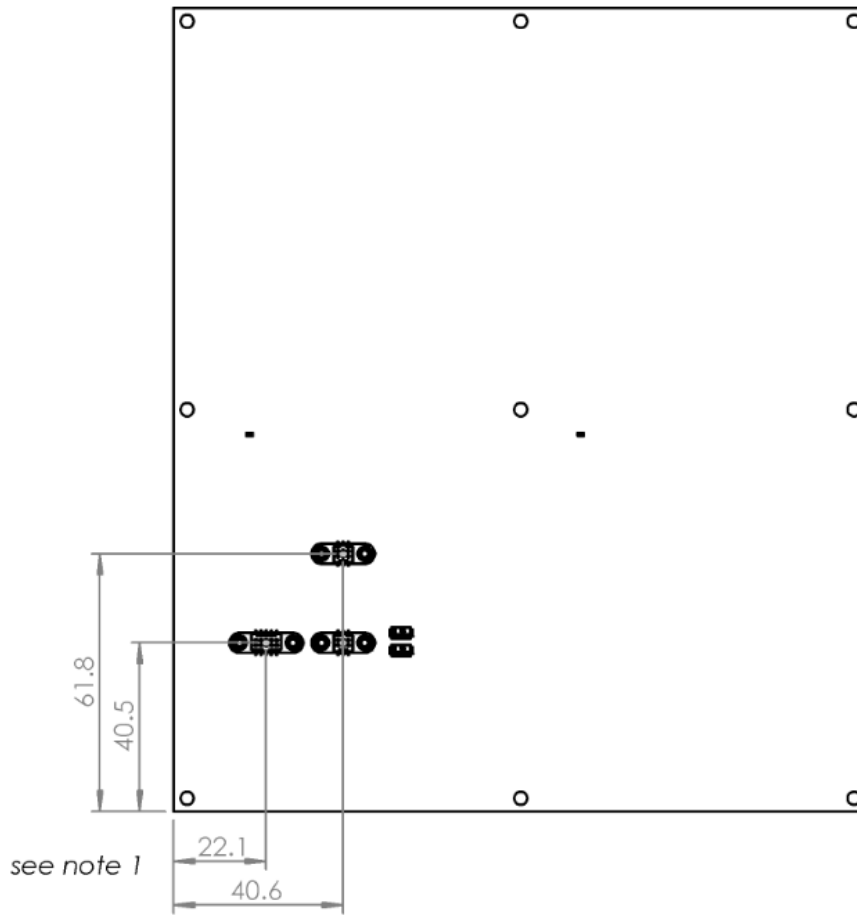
Solar Panel 40P6 - Bottom Side (connector location, dimension in mm)
